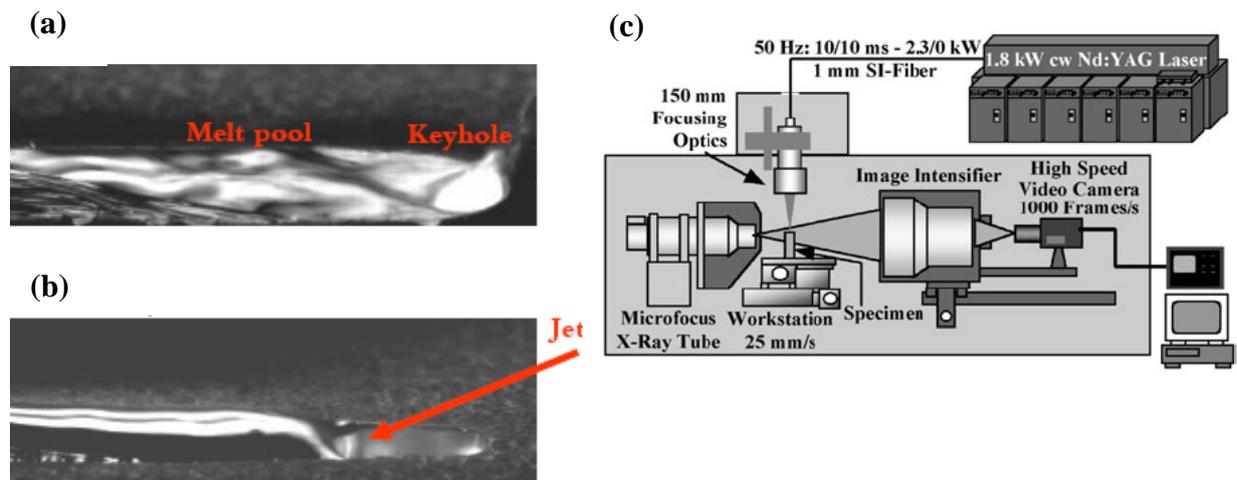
High speed imaging of the top side of the melt pool and keyhole [4]: (a) weld pool waves, (b) calmed weld through an additional gas jet directed to the keyhole rear side. (c) Example of a set-up for X-ray high speed imaging [7]
